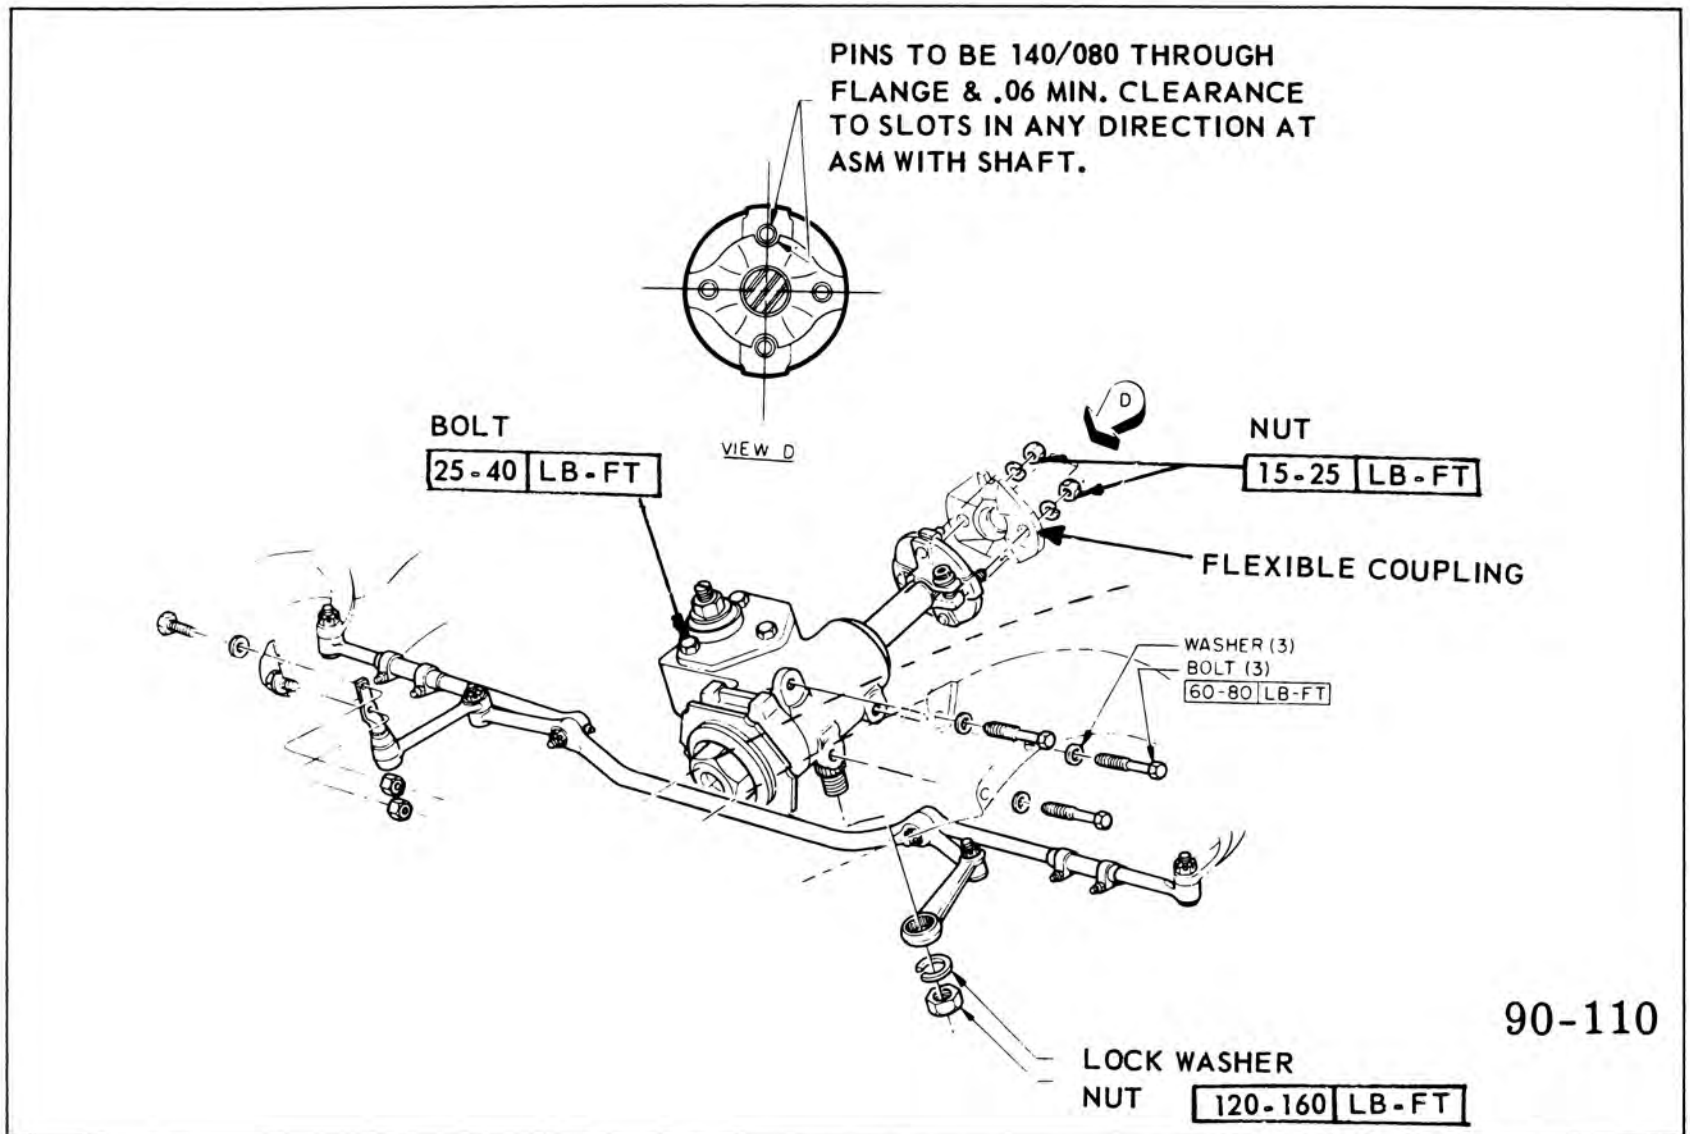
Manual Steering Gear Installation (43-44-45-46000 Series)
